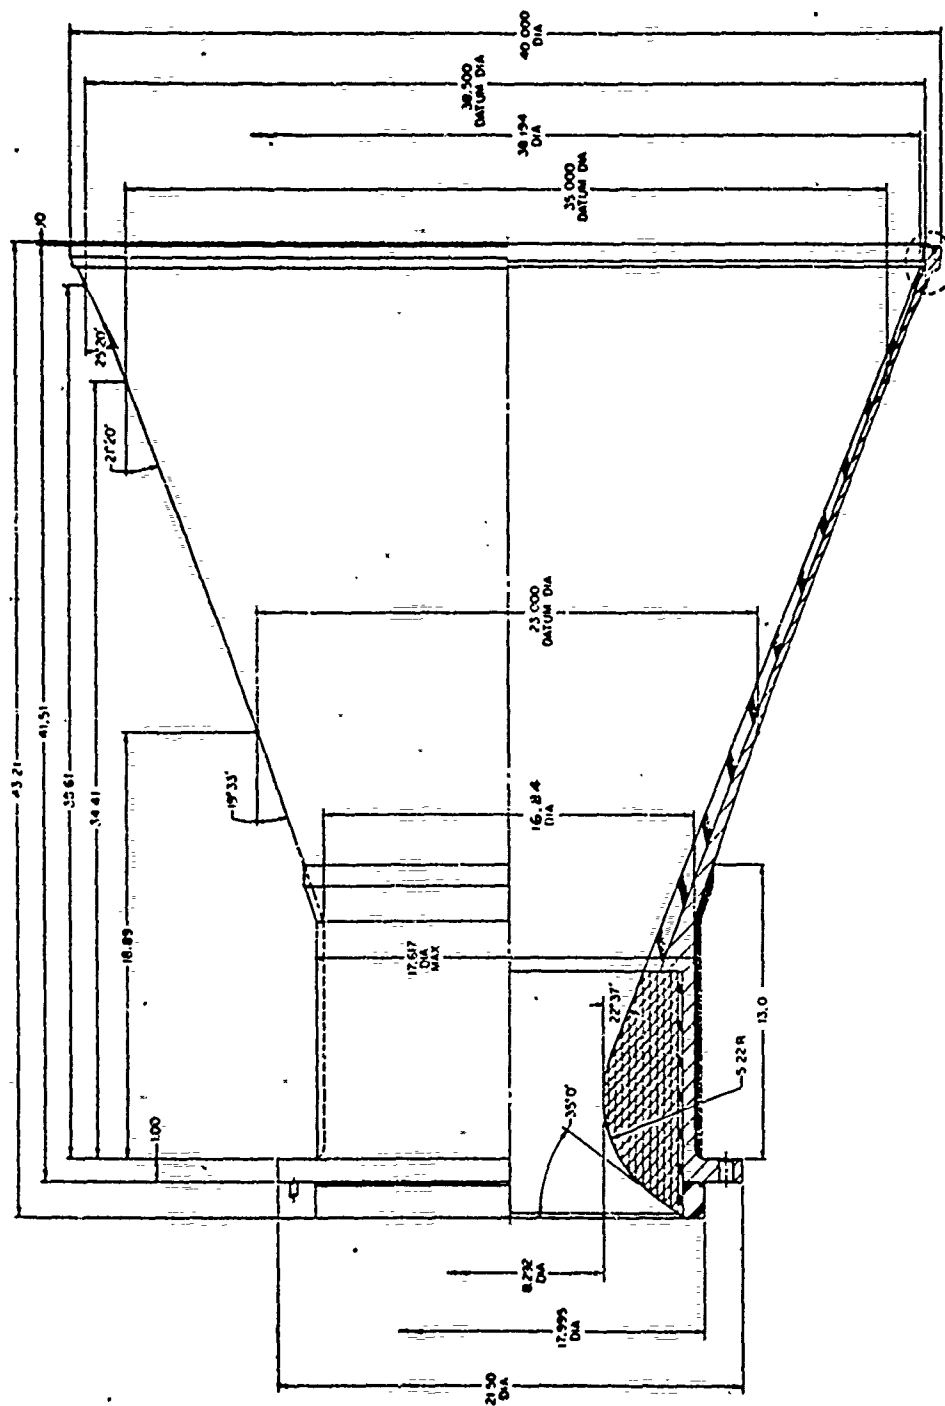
TX-354-3 ROCKET NOZZLE ASSEMBLY
